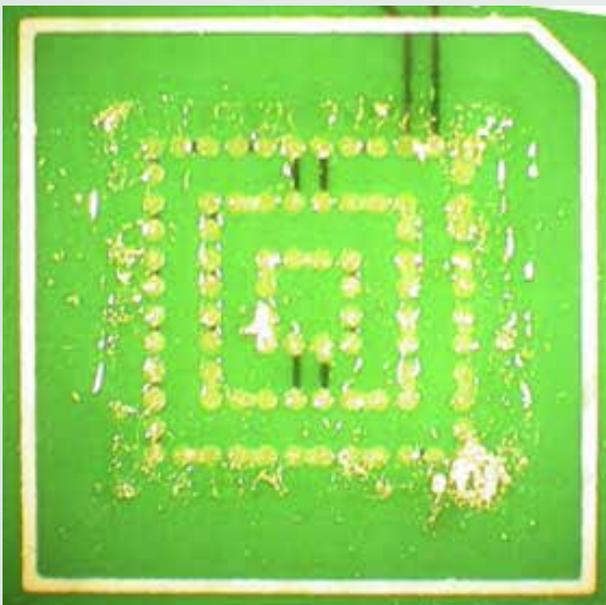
Top view of the PCB after the BGA assembled with EF-A was pried off.
